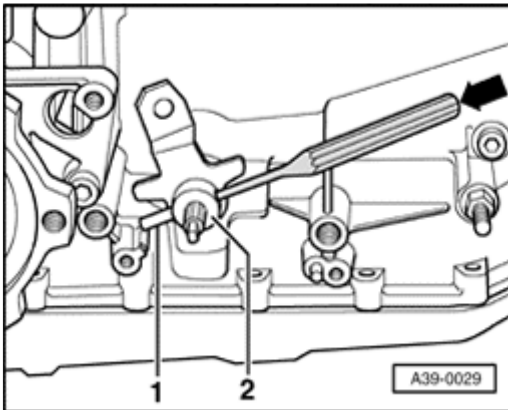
Driving Out Spring Dowel Sleeve At Lever/Shift Rod Of Travel Toward Front
